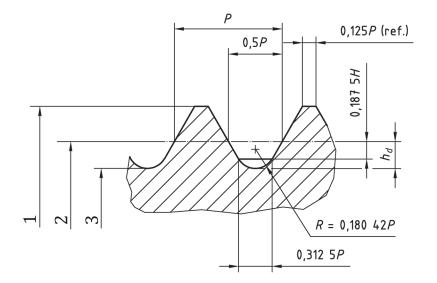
Major diameter indicating plain gauges for <u>external</u> threads
